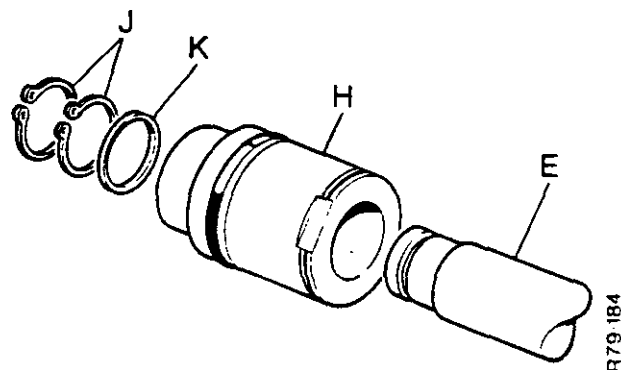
DISASSEMBLY OF THE SUPPORT RAM
